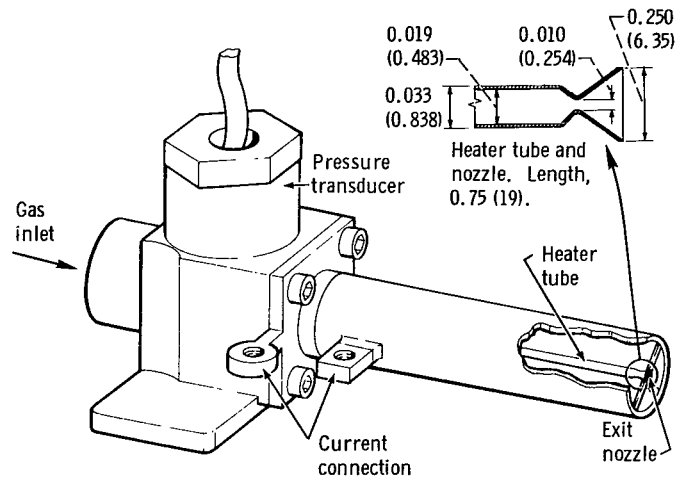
Thruster assembly. (Dimensions in inches (and mm).)
